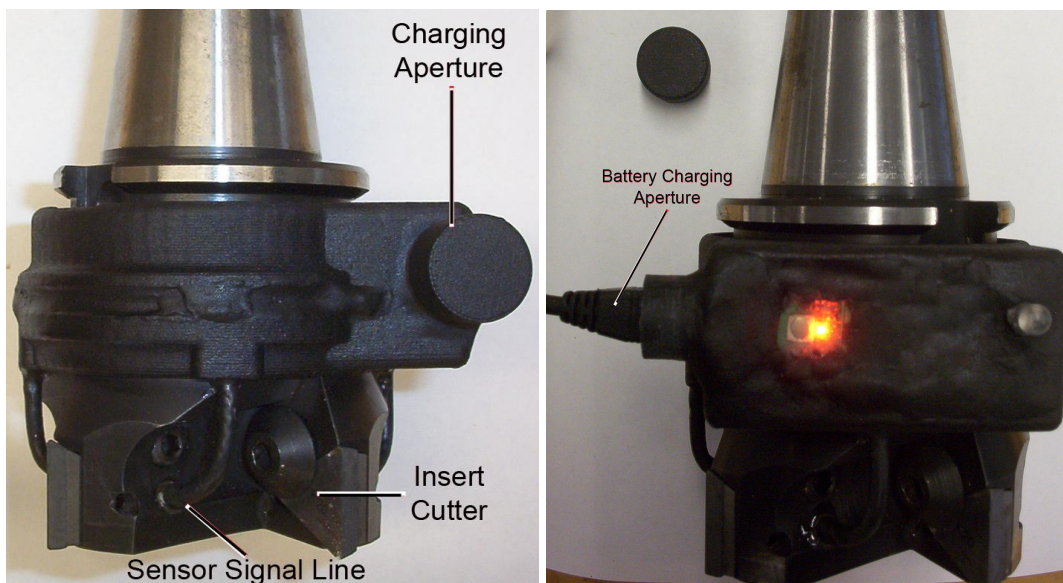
TRANSMITTER AND WIRING SHROUD
